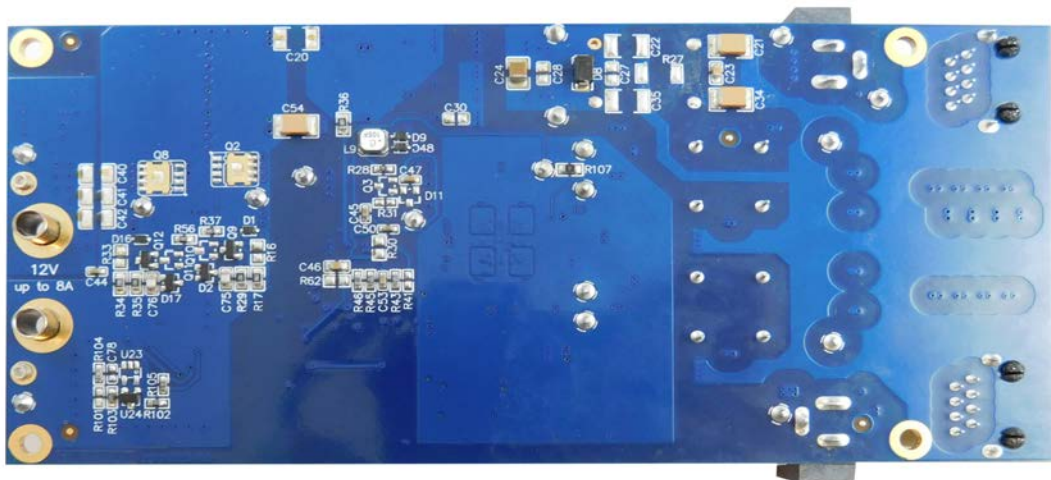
STEVAL-POE005V1 reference design PCB layer 1 top
